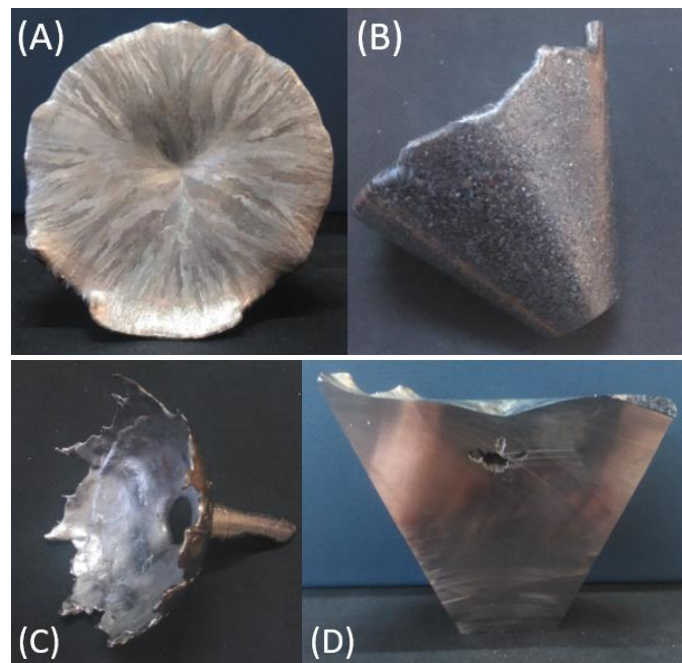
Large cast Ti-Al ingot (A) top view (B) side view (C) remaining uncast alloy solidified in the crucible and (D) cut ingot cross section
